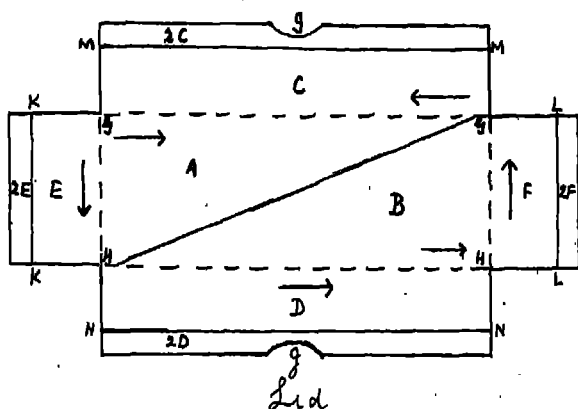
TWO-PIECE TRIAL SIZE SOAP BOILERS' BOX, TAKING PAIR OF PATS.
